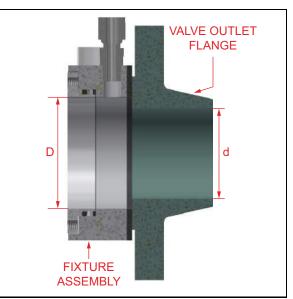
FIXTURE SIZE LIMITATIONS
